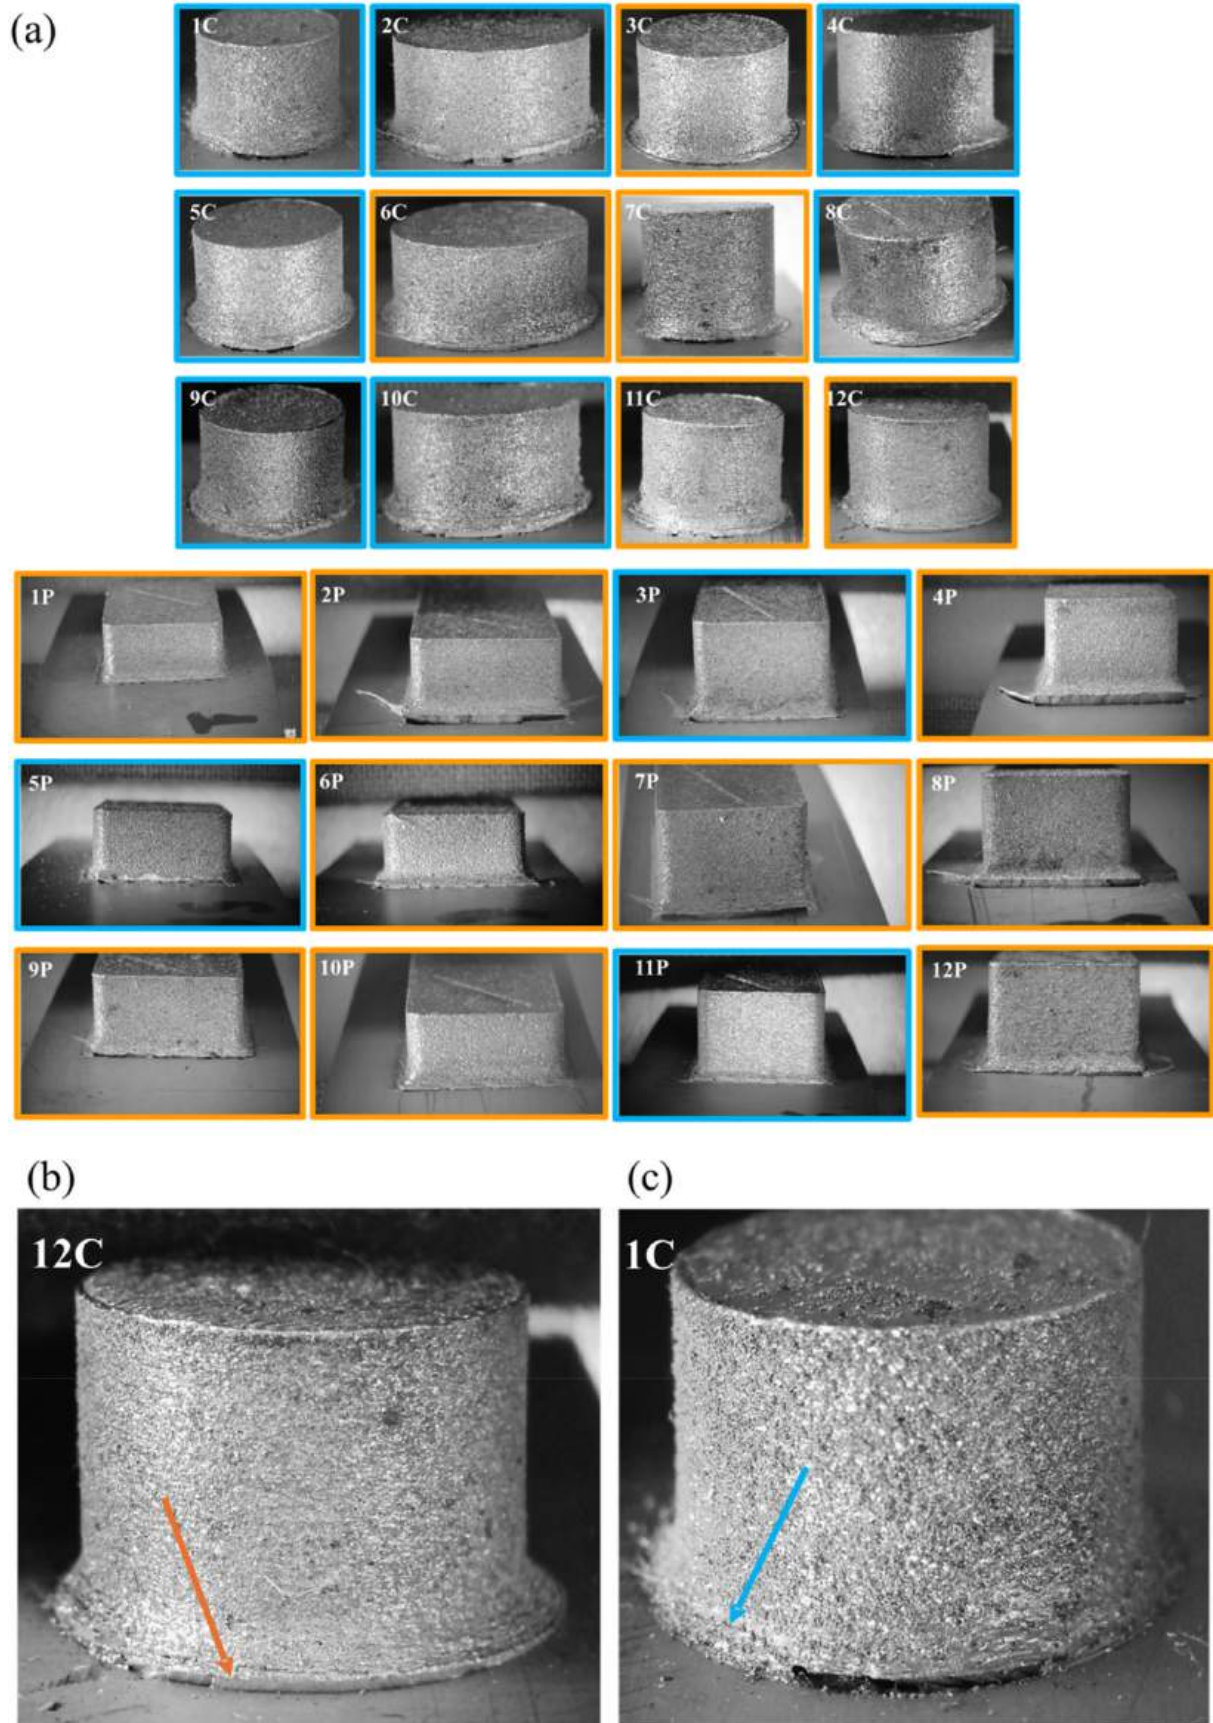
Macrographs of the fracture zones of the samples subjected to three-point bending tests: (a) All the fractured samples (cylindrical and box-shaped). samples for which the failure began at the base of the fillet orange box and samples for which the failure began on the fillet blue box, (b) Sample 12C in which the fracture started at the base of the fillet; (c) Sample 1C in which the fracture started in the fillet area.
